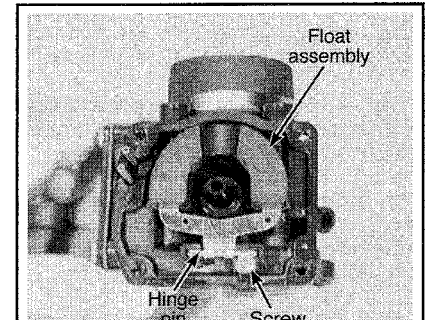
Remove the Phillips screw securing the float and hinge pin
